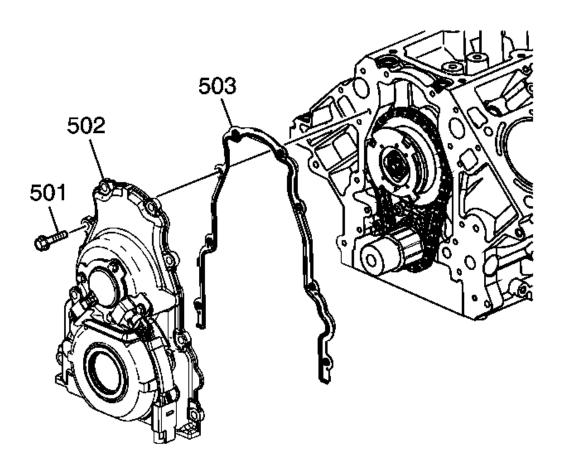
View Of Front Cover, Bolts & Gasket Courtesy of GENERAL MOTORS CORP.
